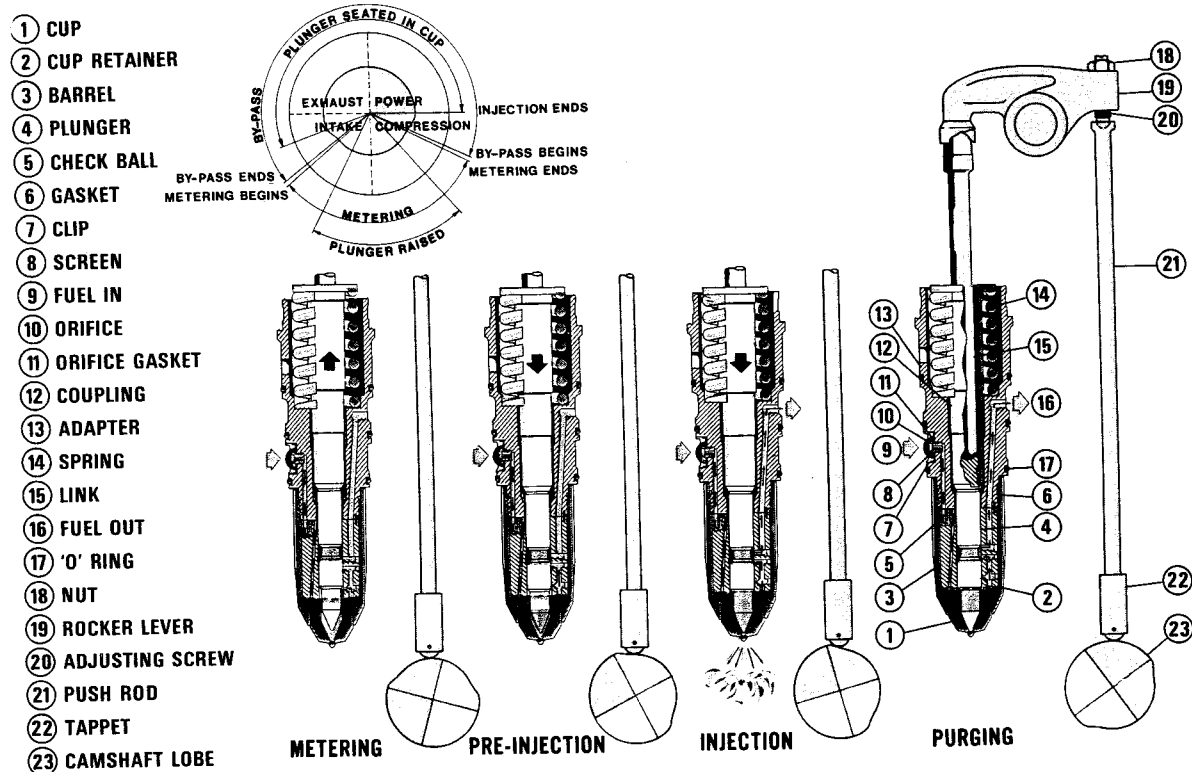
, (FWC-24). Fuel injection cycle PT (type D) injector 3/8 inch diameter plunger
